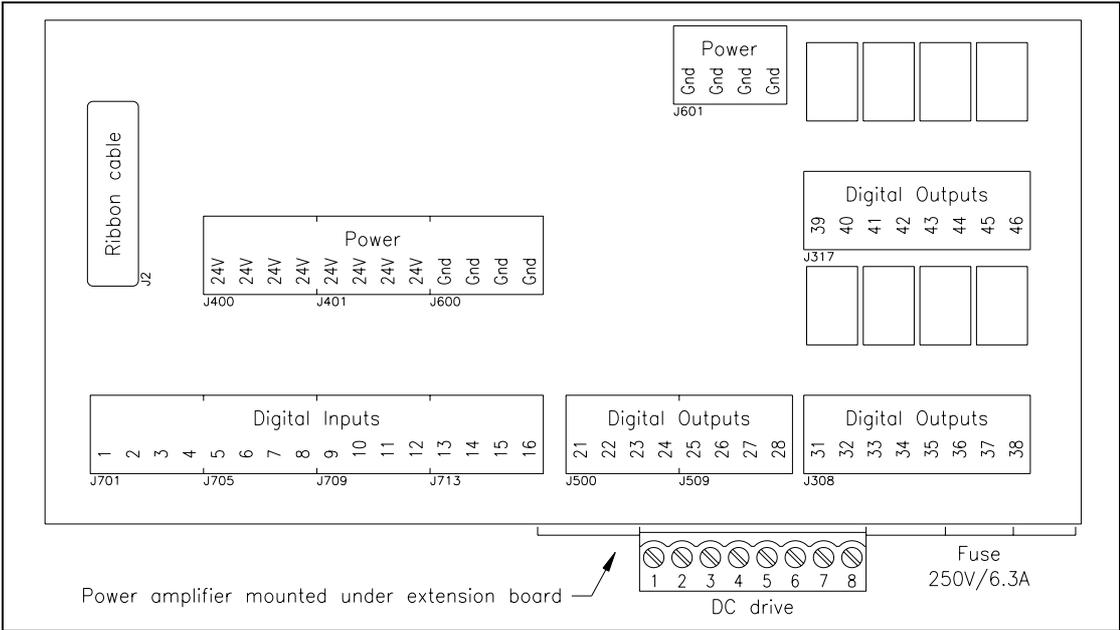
Screw terminal arrangement on the extension board and the power amplifier for the DC drive K600007e
